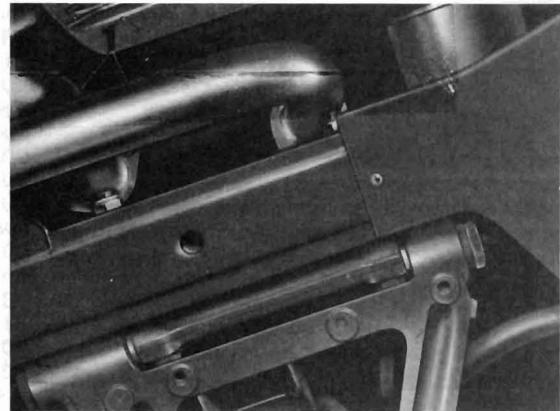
Exhaust downpipe (1) attachment to manifolds (Sec 11)
